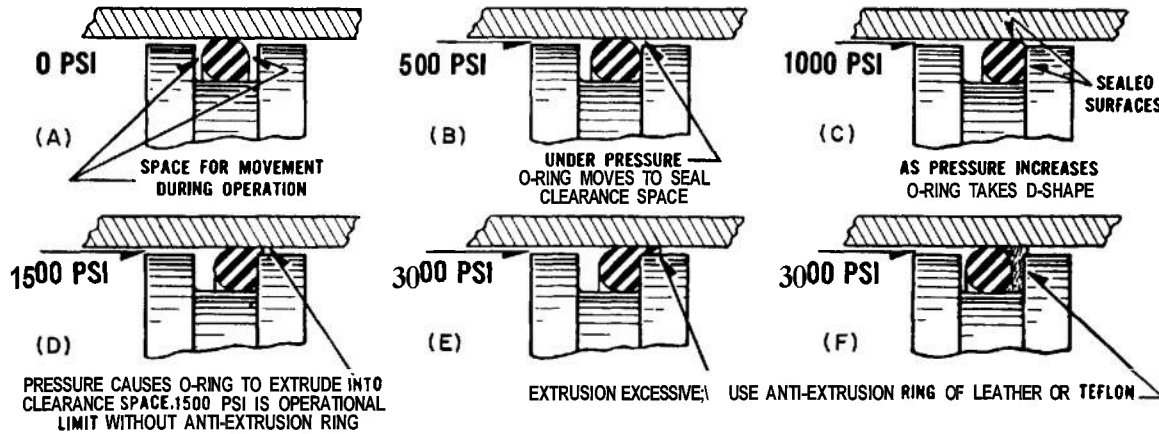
Use of Antiextrusion Rings to Prevent O-Ring Failure
